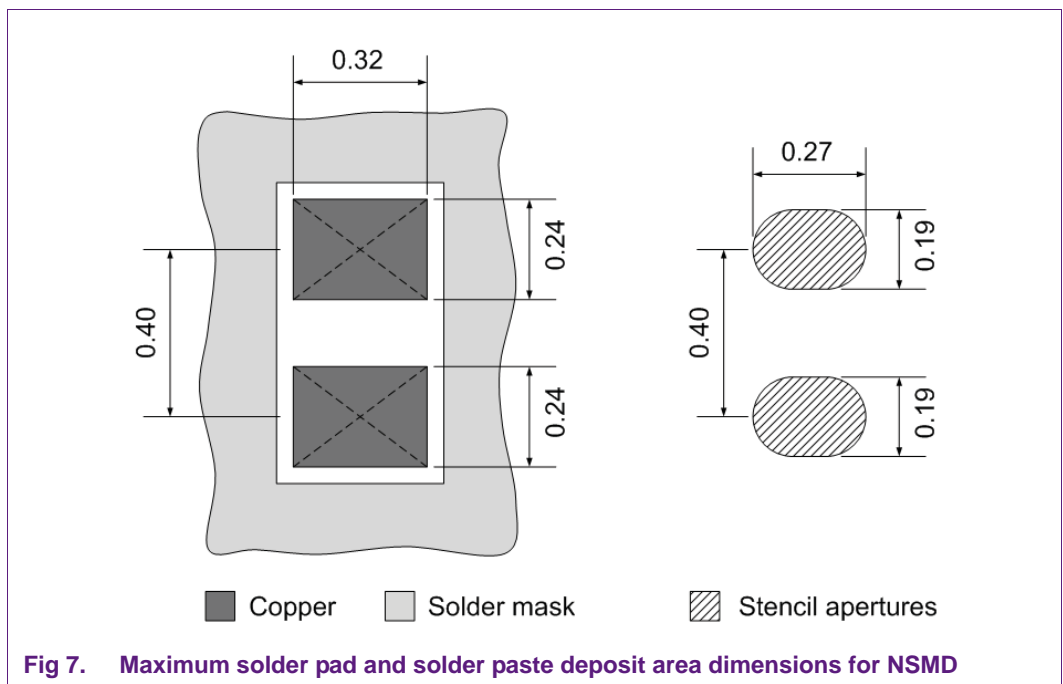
illustrates the maximum allowed solder pads and solder mask opening as well as the solder paste deposit area which was tested without any fails.
